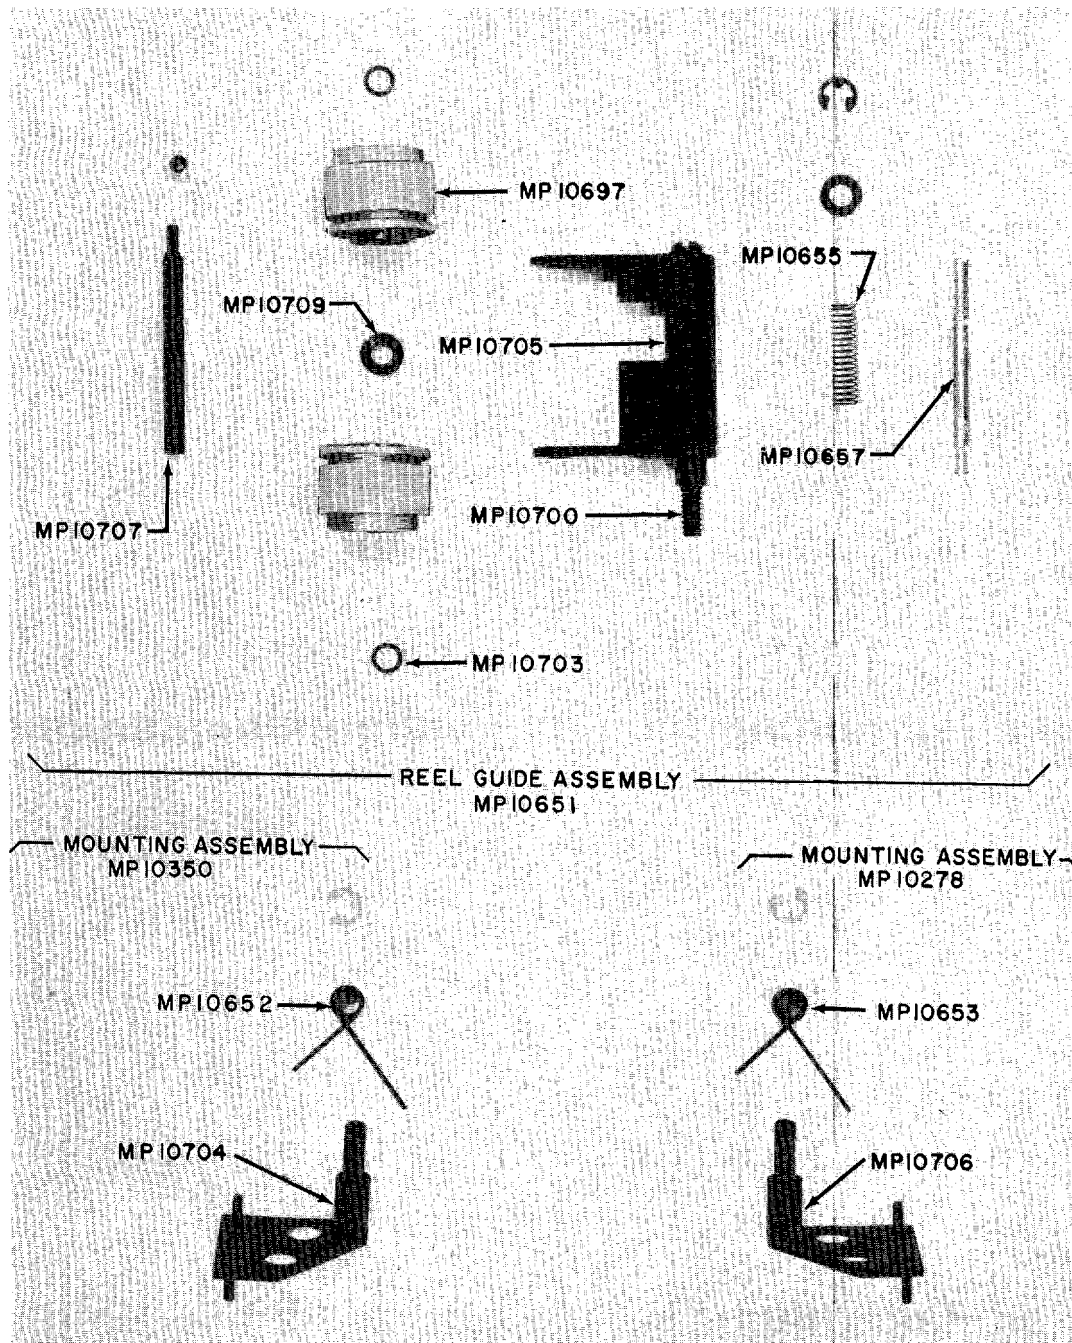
A. Reel-Guide and Mounting Assemblies, Parts Callouts
